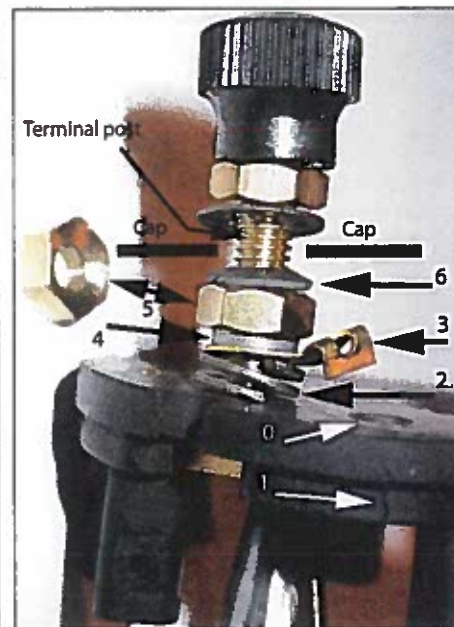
The stack of components on the terminal post: 0 -- a hole in the pedestal for one of the two mounting screws. 1 -- the pedestal "deck" will crack if the mounting screws are over-tightened. New pedestals are redesigned with stronger support posts to help keep this from happening.
